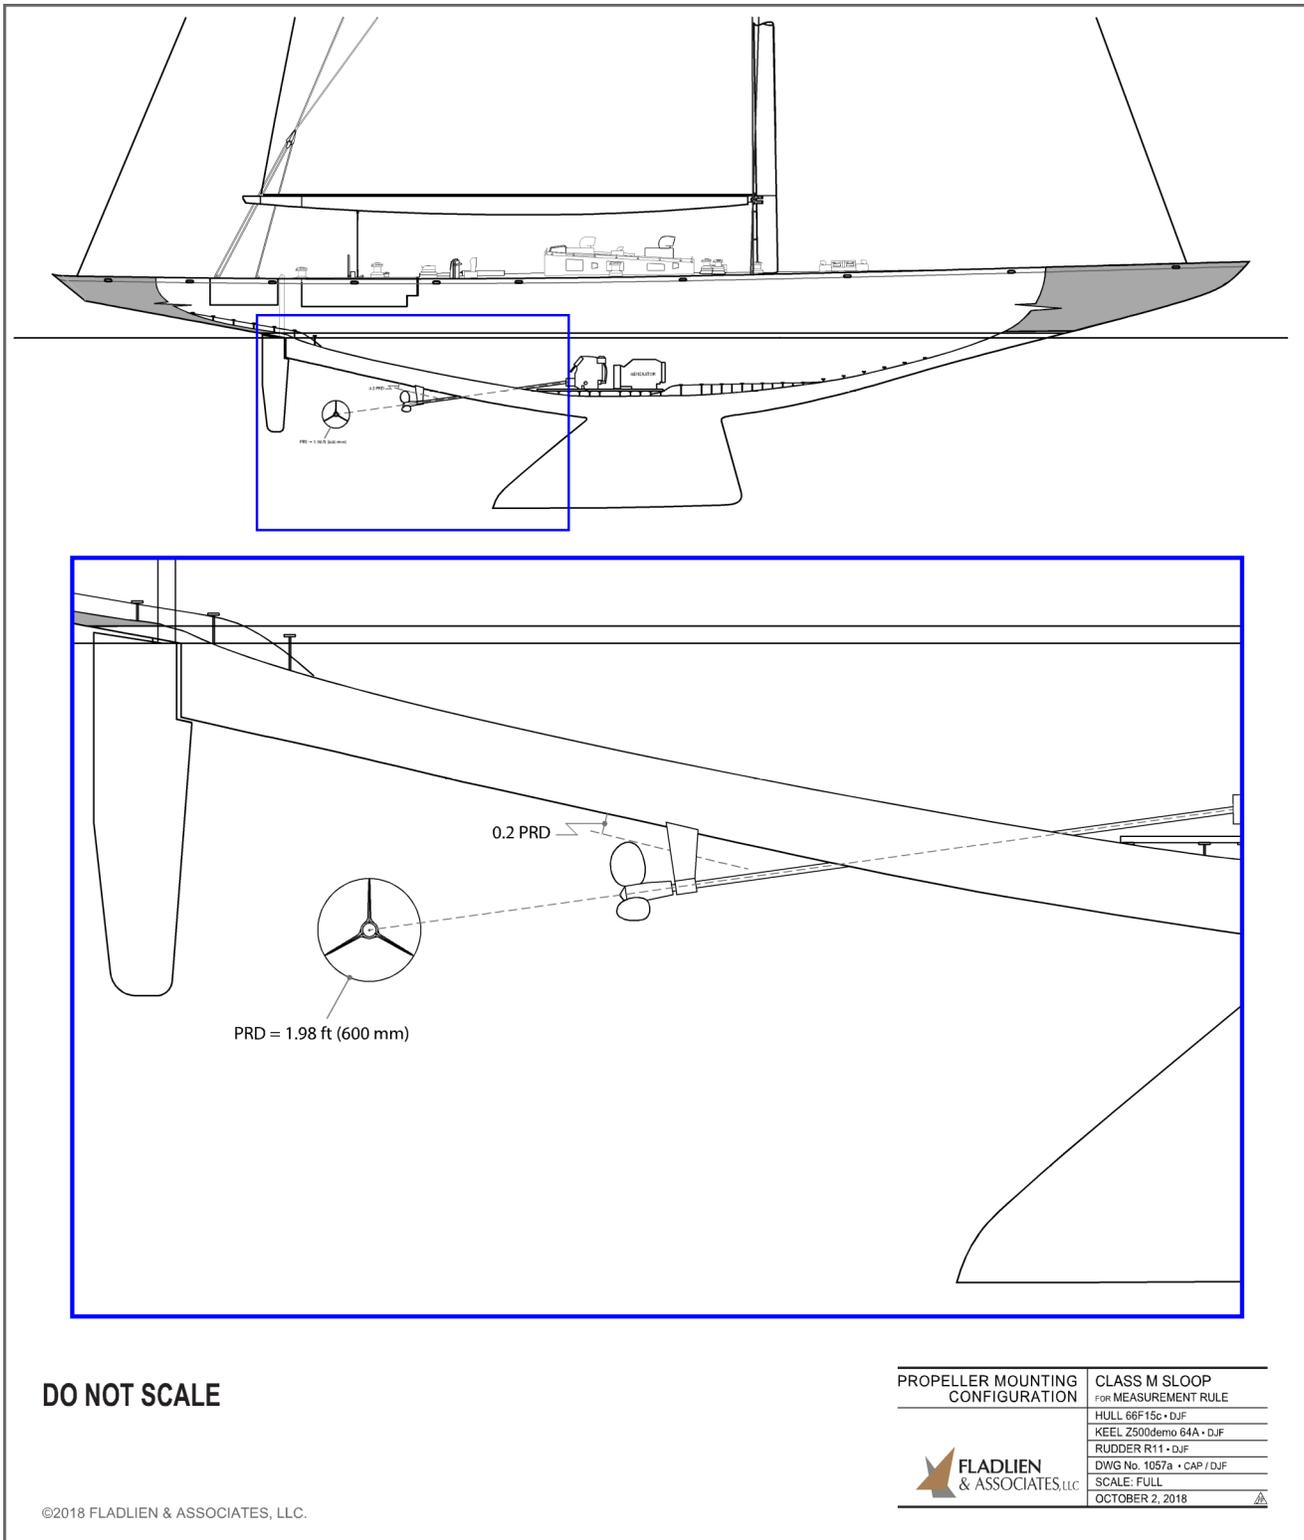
PROPELLER MOUNTING CONFIGURATION
